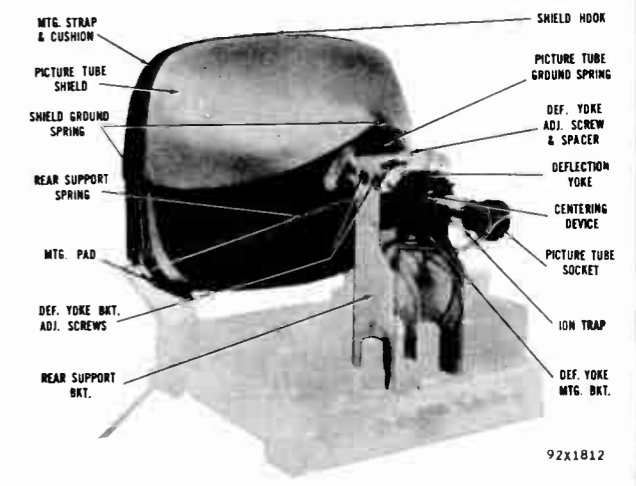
B. 20 or 21" Glass Pix Tube Mounting
